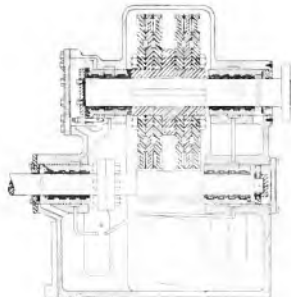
Single-reduction Gear for connection of each Exciter Turbine to its Generator
